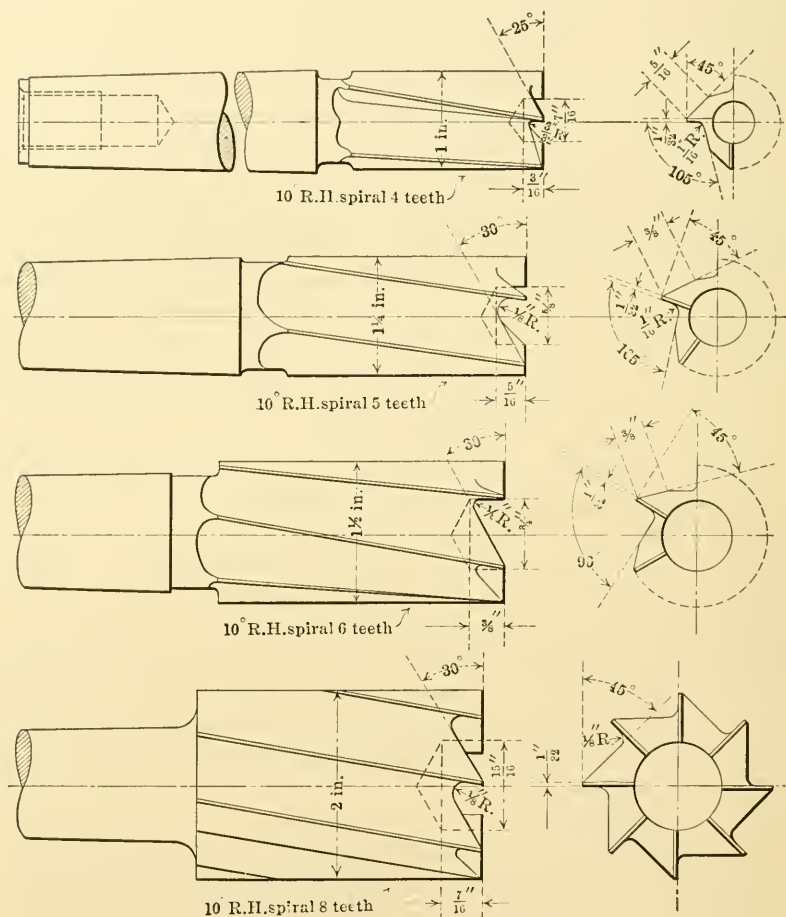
NEW TYPE OF TAPER SHANK END MILLS
